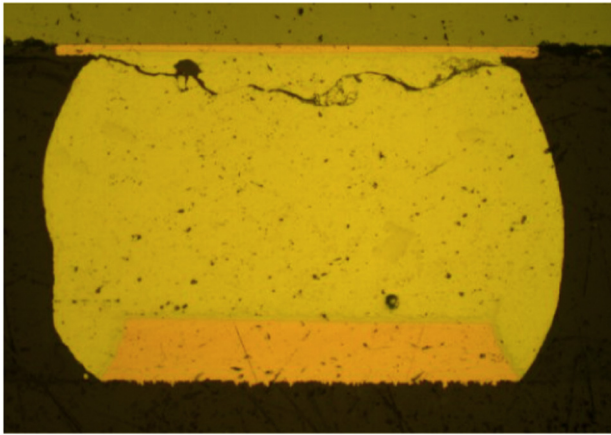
Cross-section of failed solder joint after 4 pt bending cycling testing.
